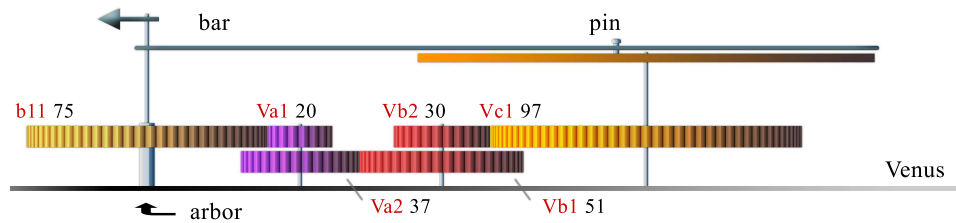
Side view of the optimized gearing schematic diagram of the Venus epicycle gear train, starting with a 83-teeth fixed gear instead of a 32-teeth gear. Further properties are equal to Figure 7.13.
